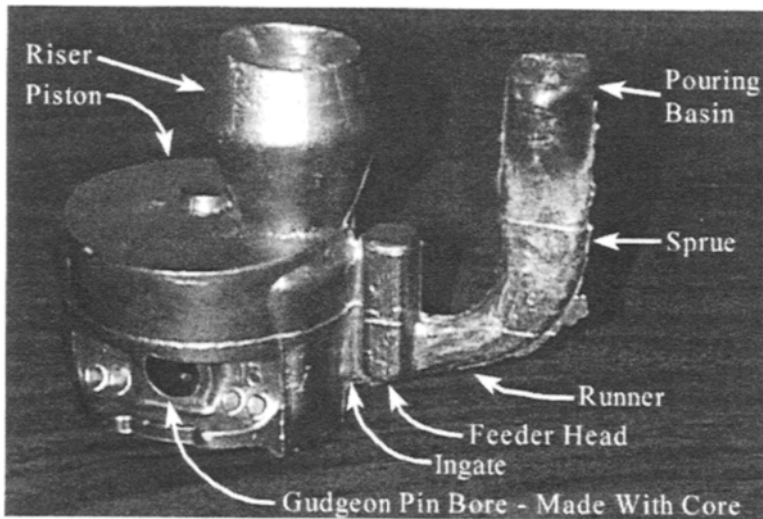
Casting of a piston for an internal combustion engine with feeding system and riser still attached.
